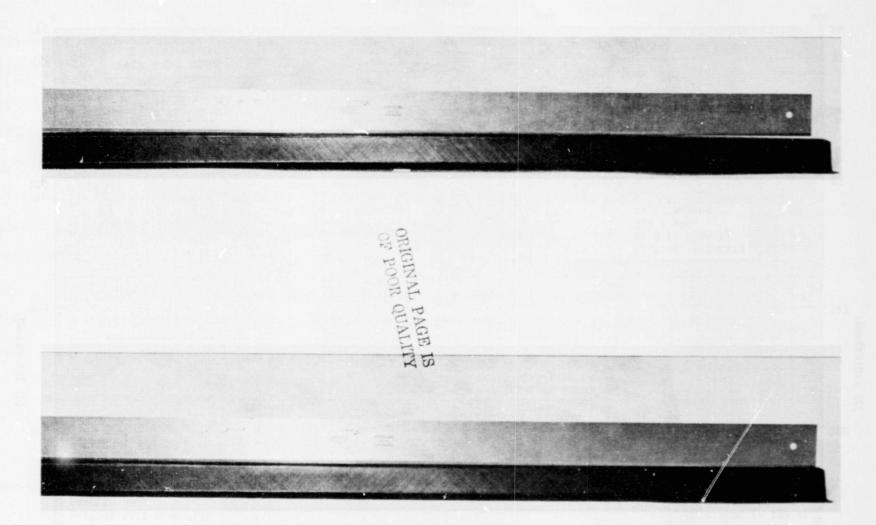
"Hat" Stringer Molded on Reverse Formed Tool—Showing Flat Condition
